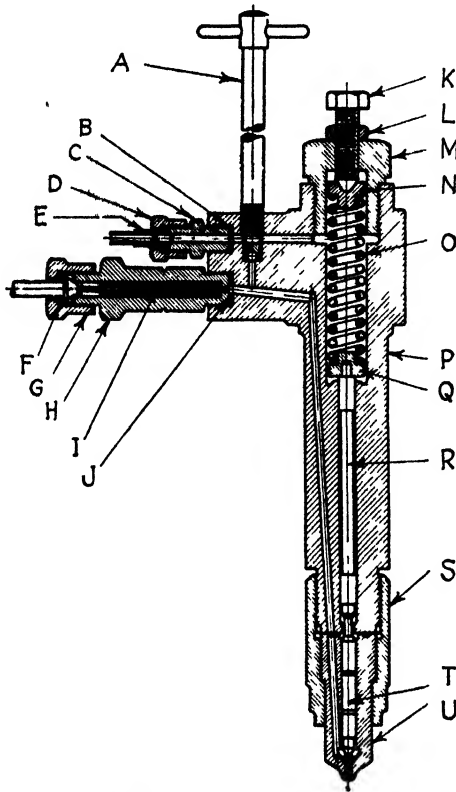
Parts of a Bosch spray valve, with parts as listed: A = bleed or by-pass valve; B = gasket; C = connector; D = packing gland; E = bleed or vent line; F = oil line from pump; G = gland; H = connector; I = oil filter; J = gasket; K = spring adjuster; L = locknut; M = valve cap; N = spring cap; O = spring; P = valve body; Q = spring collar; R = upper stem; S = clamp; T = differential needle; U = tip.
